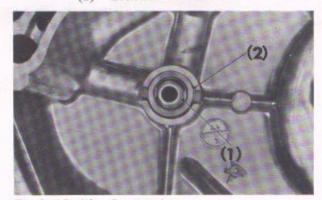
(1) Stopper ring (2) Oil guide metal
